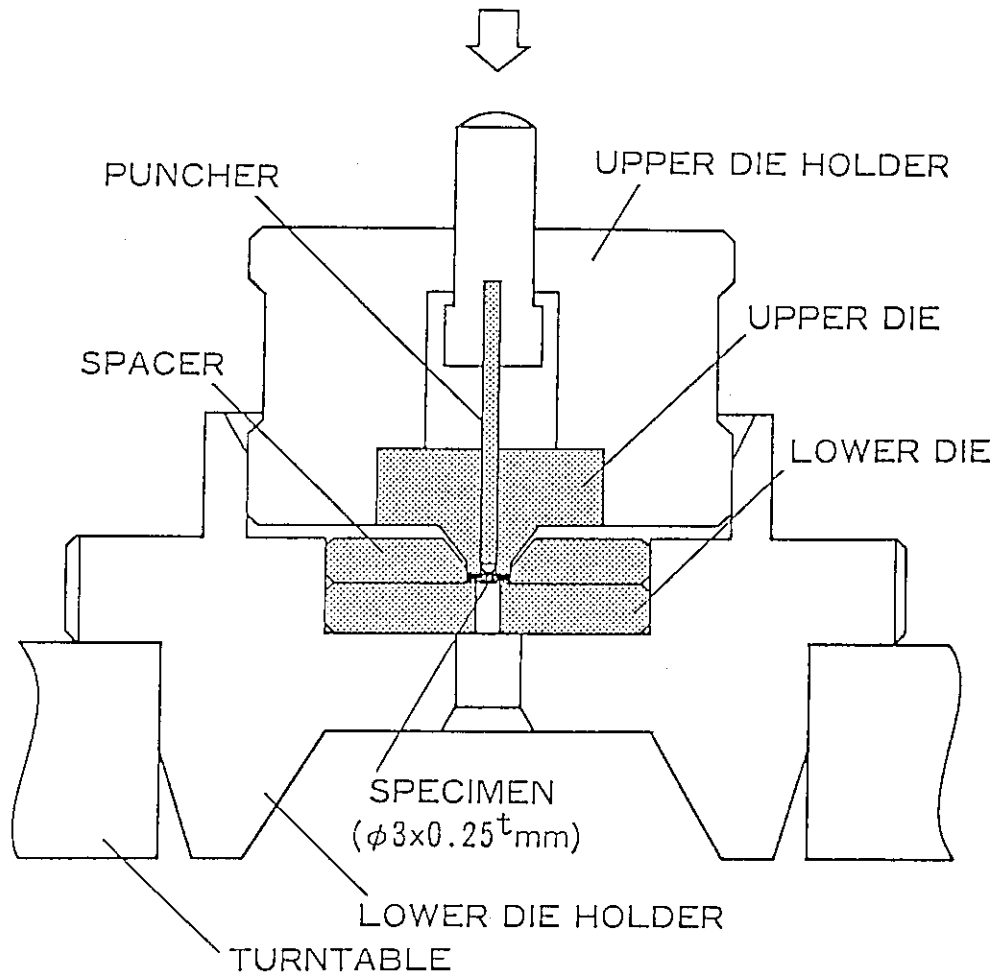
Cross-Section of the Test Fixture for Small Punch Test
